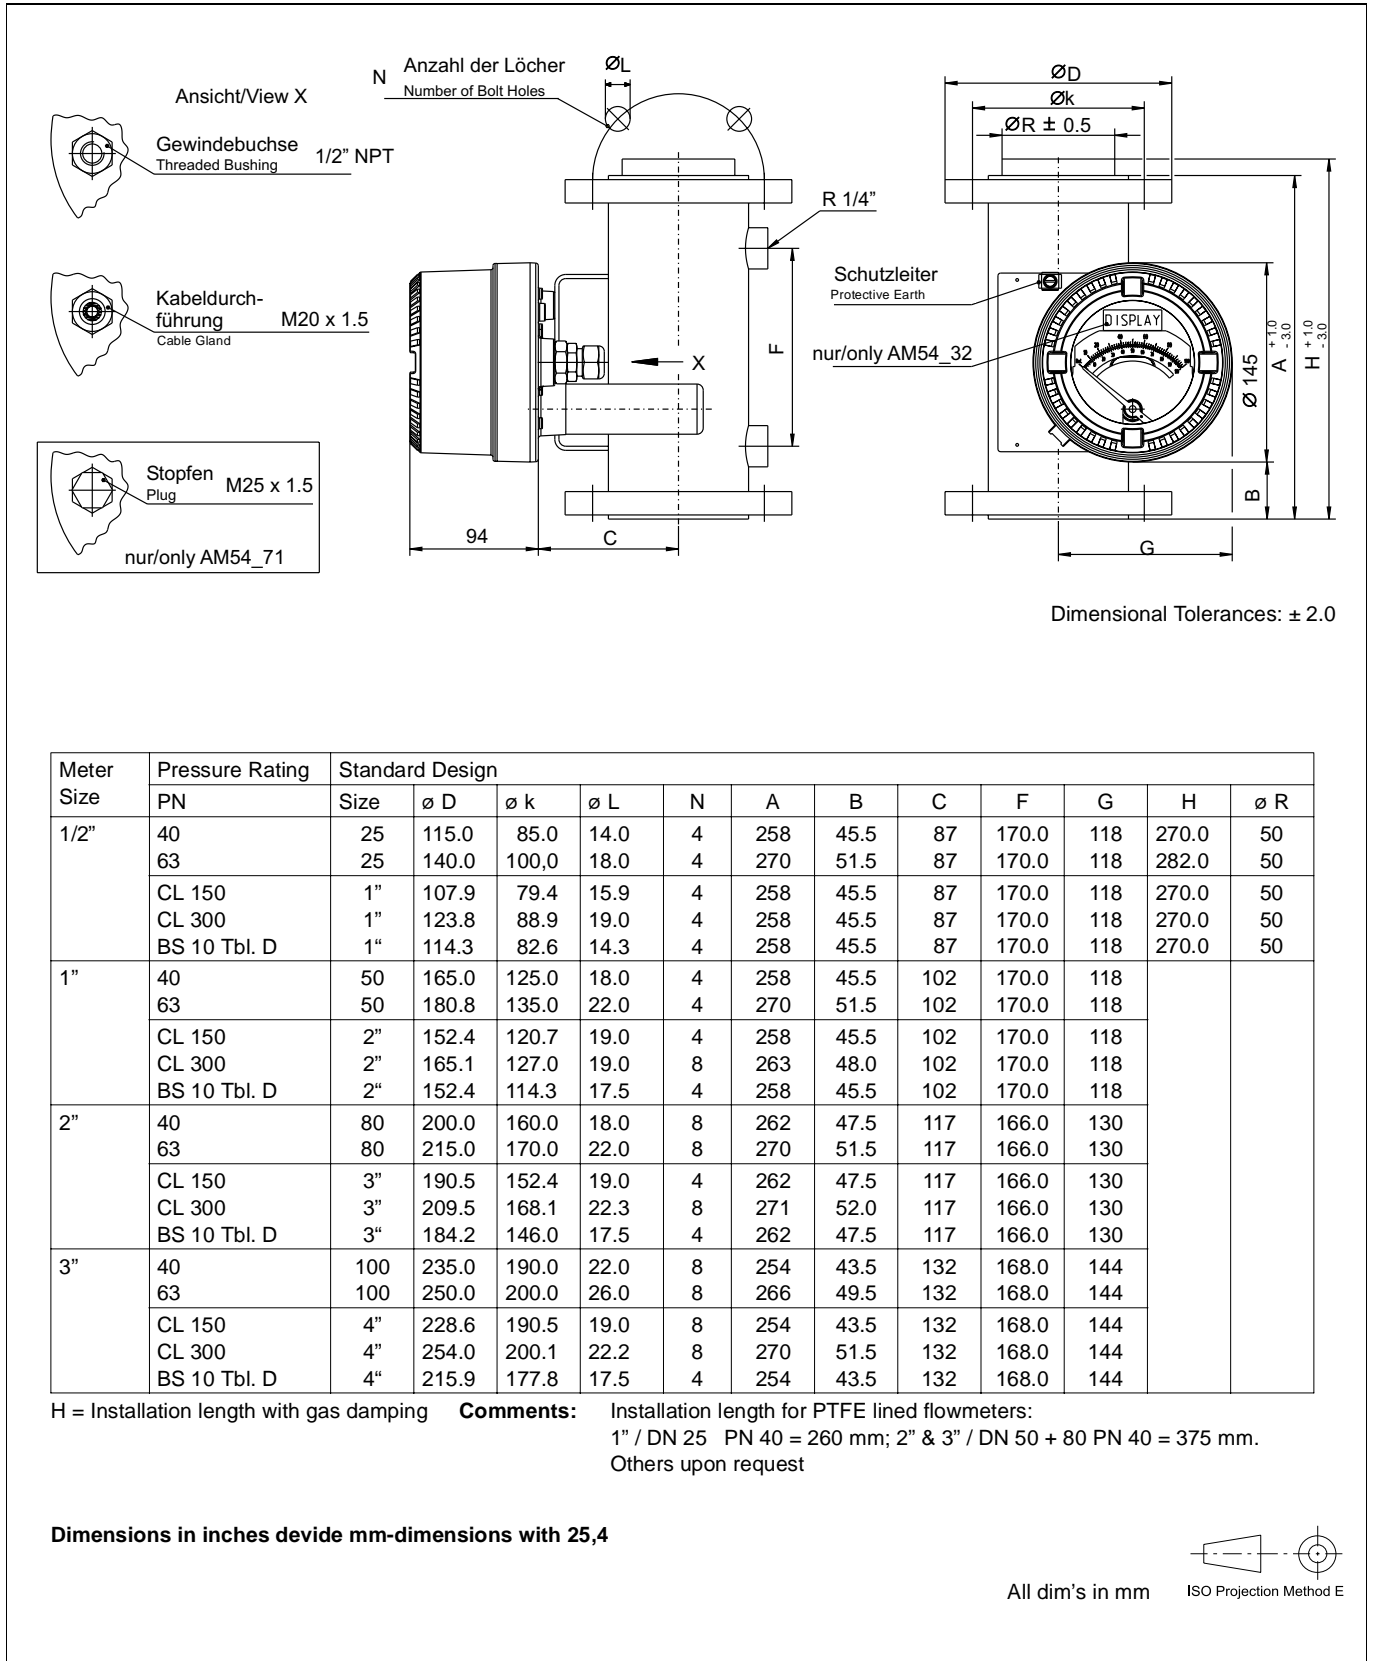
Dimensions and Connections for Installation Length 250 mm (Steam Jacket Design)
